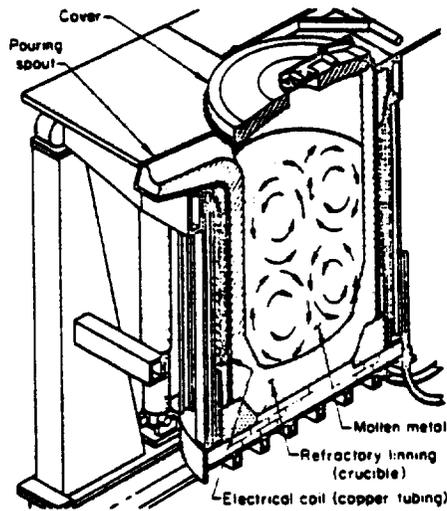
SECTIONAL VIEW THROUGH A CORELESS INDUCTION-MELTING FURNACE (16)
